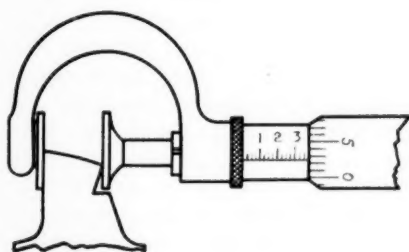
Drawing illustrating method of measuring tooth with button micrometers.
